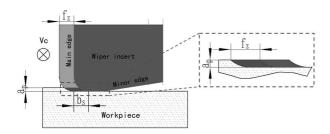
Geometric principle of the wiper insert of the milling cutter [5]
